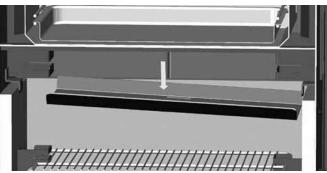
DISASSEMBLING THE DEFLECTOR
